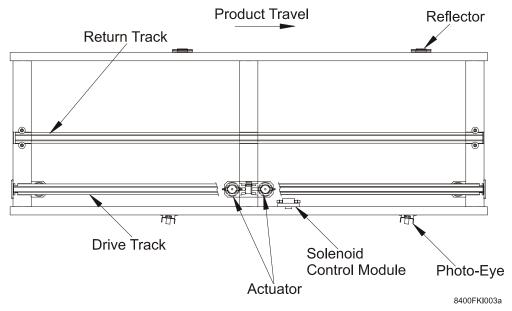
AGPE Accuglide Intermediate Straight Section (RH Assembly Shown)
